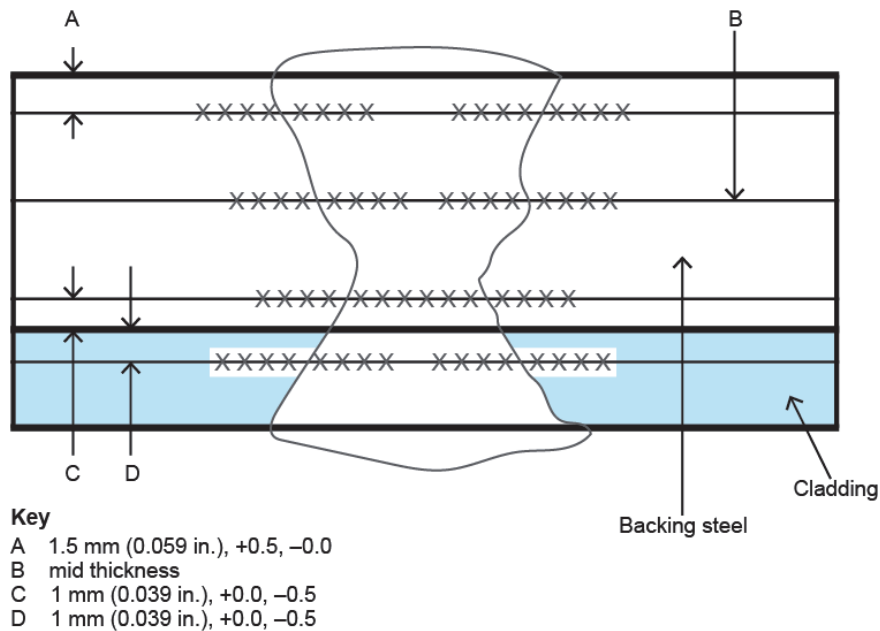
Welded Clad Pipe or Lined Pipe When Process Involves Seam Welding of the CRA
